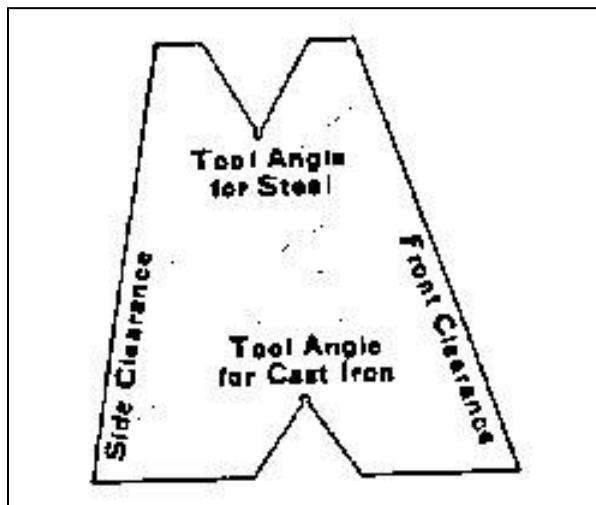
Pattern for Making a Tool Bit Grinding Gauge
